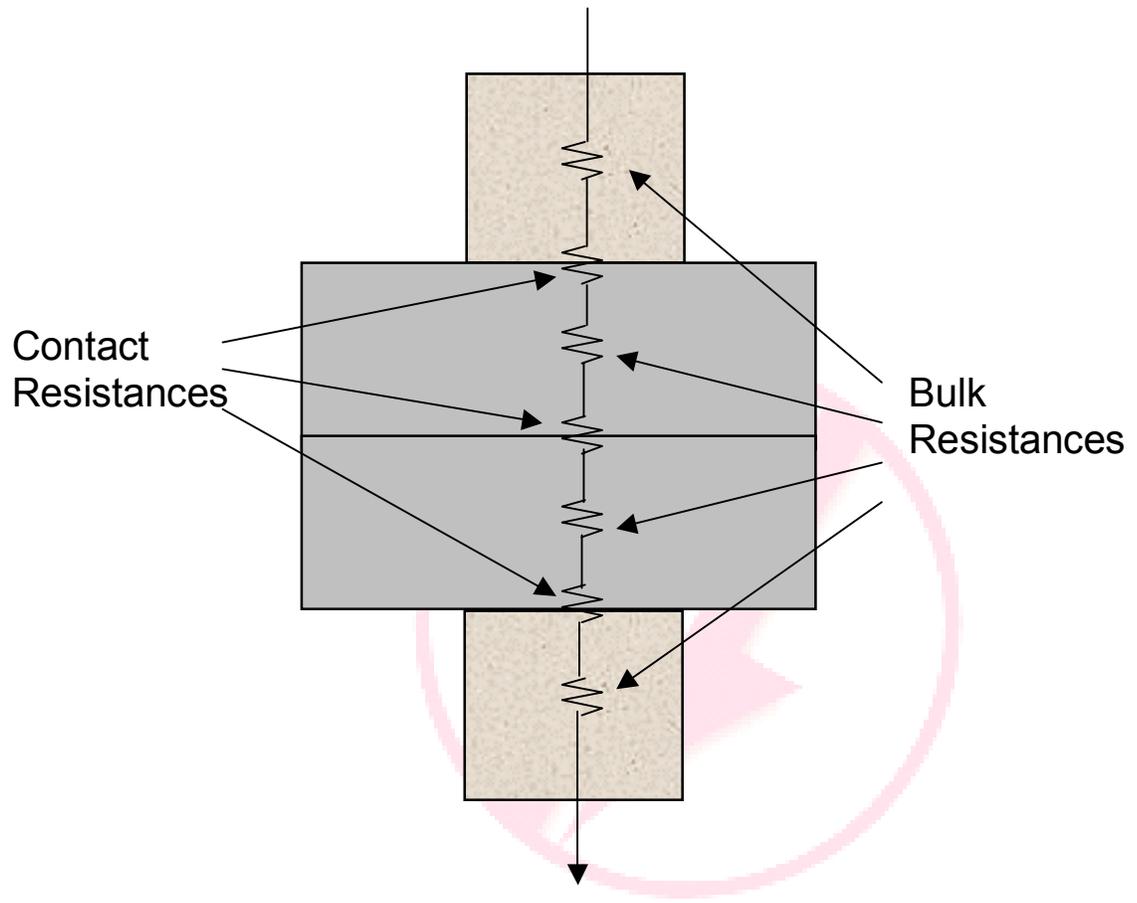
Schematic showing a typical resistance welding stack with two electrodes on top and bottom pinching the parts to be welded. Also shown are four bulk resistances and three contact resistances.
